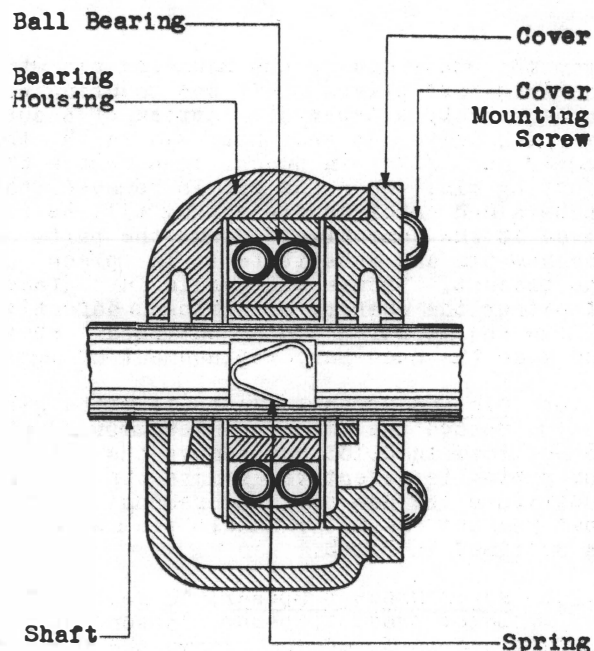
Internal Parts of Bearings Equipped with Removable Spring
